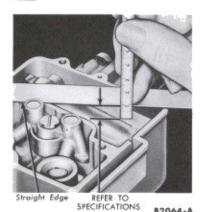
Ford Dual Carburetor Fuel Measurement— Typical
